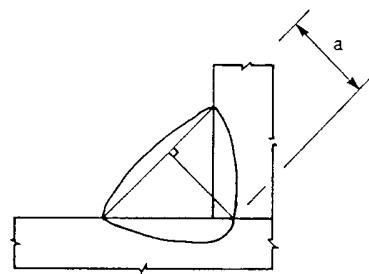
Throat thickness of a deep penetration fillet weld
